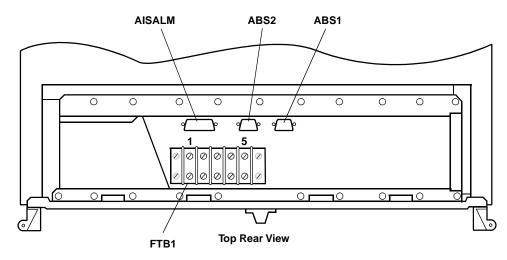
NTRX25AD Power Filter Kit Assembly
